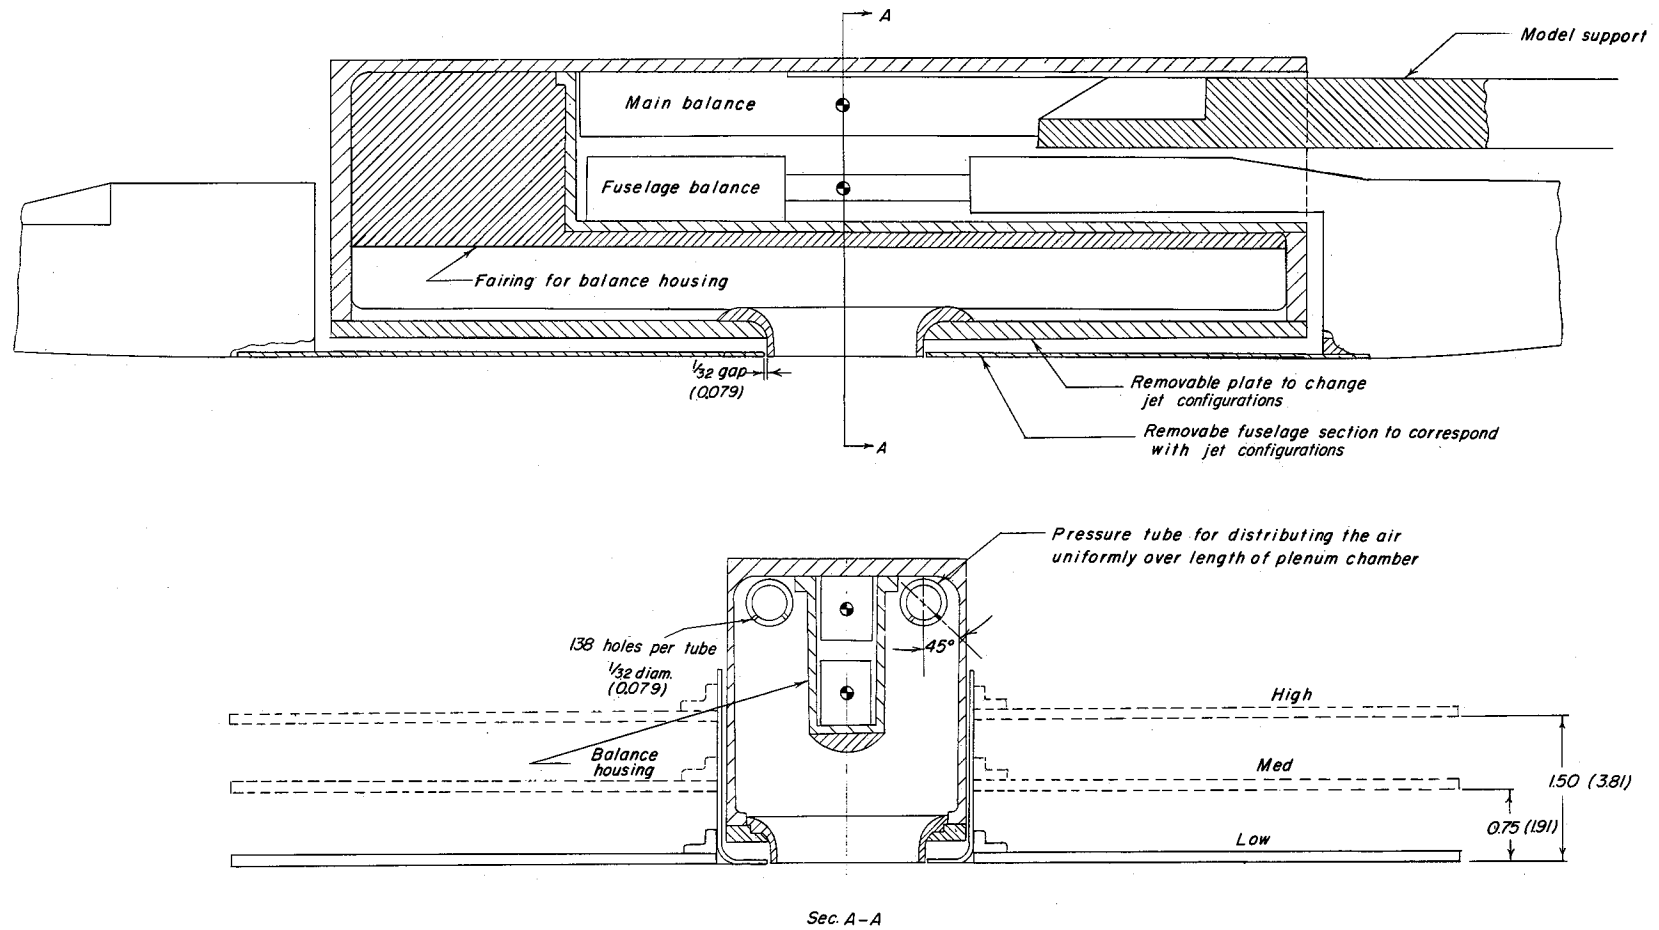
Drawing of internal plenum chamber, fuselage, adjustable wings, and balance system employed in investigation.
